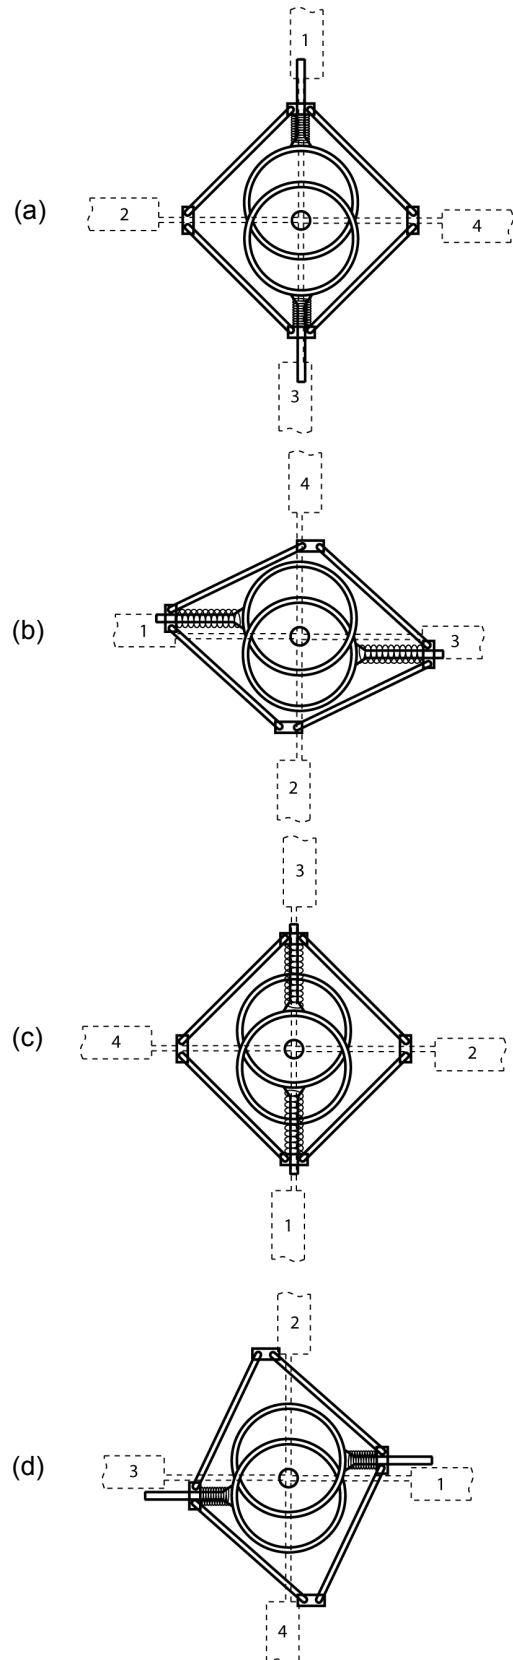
Multiple disc mechanism during one revolution, four blades, top view
